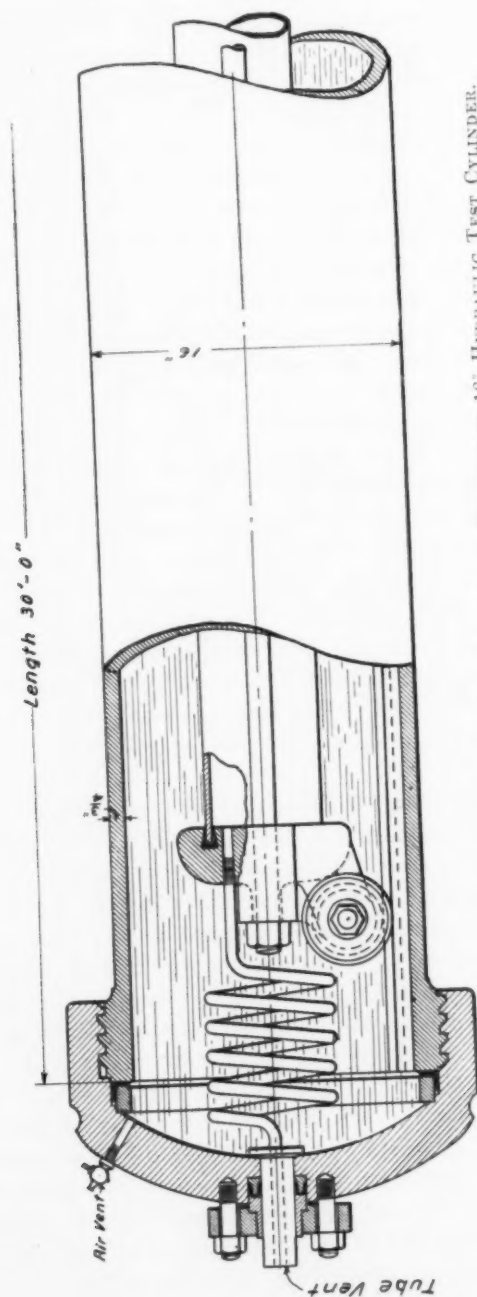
EXPERIMENTAL TUBE WITH BOLTED TEST HEAD SHOWN IN POSITION IN 16" HYDRAULIC TEST CYLINDER.
